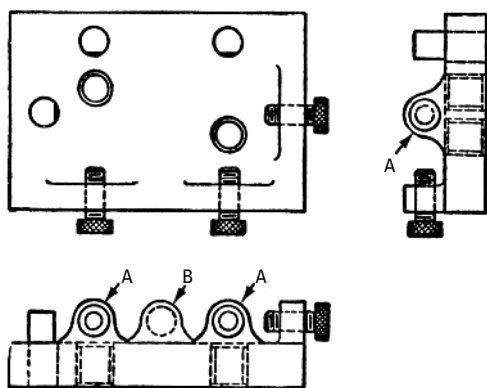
Note the use of a reversible clamp jig for the tap drill operation (top), and reversing the jig to drill the hole for the stud in the cylinder head (bottom).
